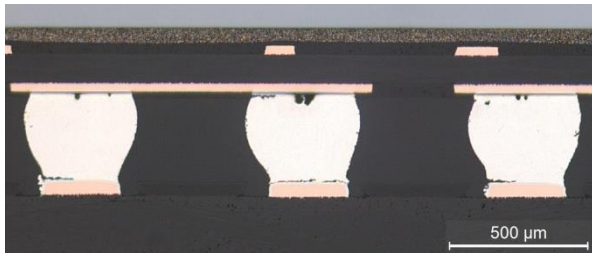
Cross-sections of solder joints T8-T10 in the second row of solder joints to a BGA208 with the SN100C/SN100C combination that failed after 908 cycles taken with ordinary light.
